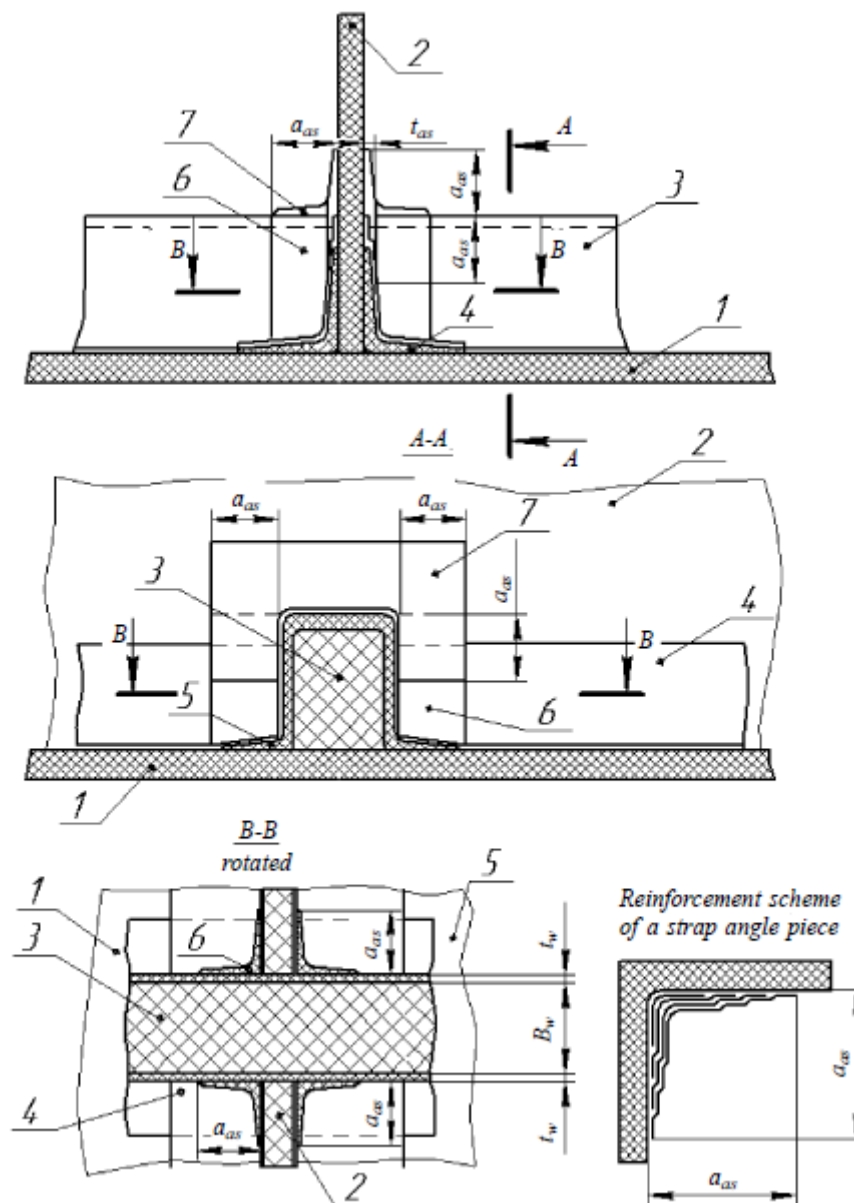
Passage assembly for a closed box section framing member running through the watertight transverse bulkhead:
